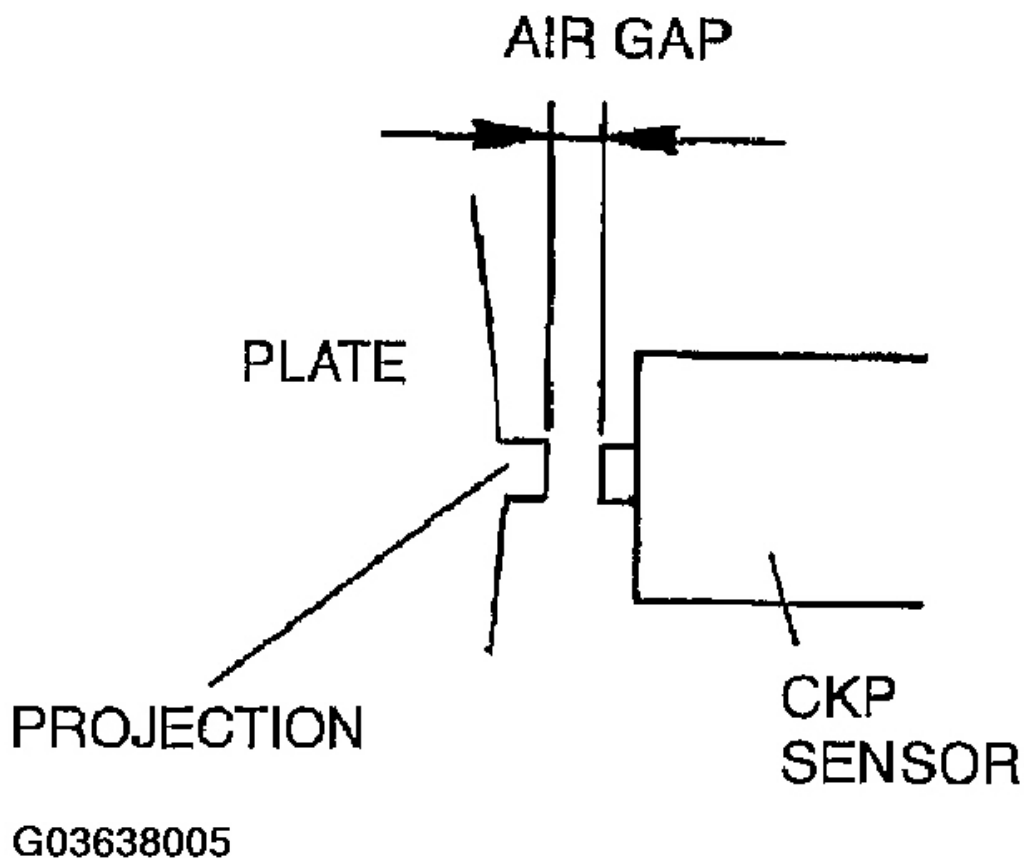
Adjusting Air Gap Between CKP Sensor And Four Projections On Plate
